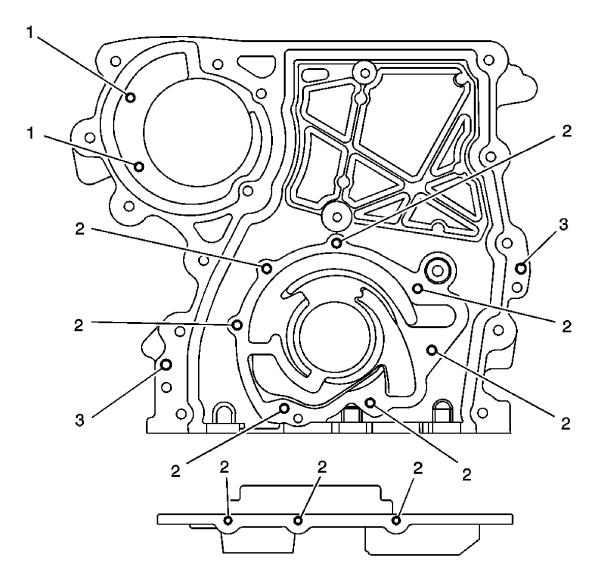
View Of Engine Front Cover Courtesy of GENERAL MOTORS CORP.
